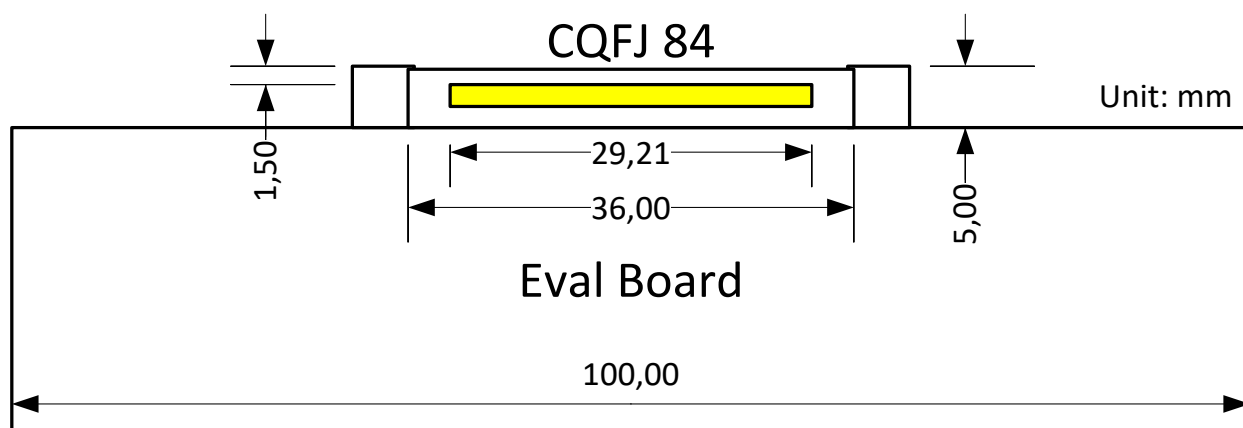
SPAD eval board side view with CQFJ 84 package (dimensions)
